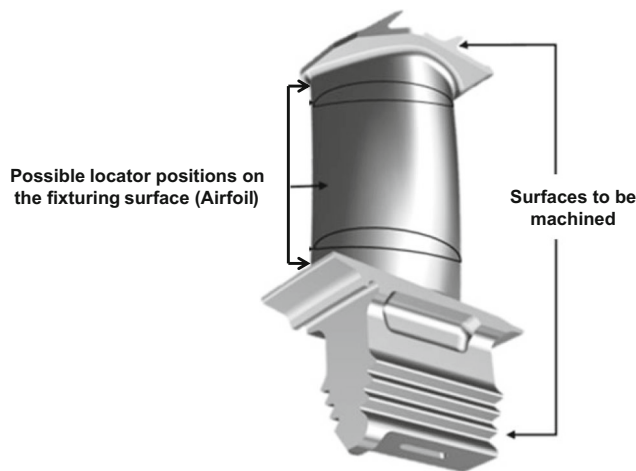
Schema of the blade showing the possible locator positions and the surfaces to be machined
